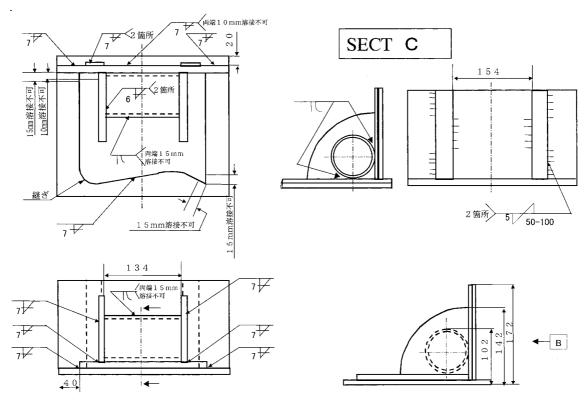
Shape and dimension of internal qualification test of specimen for welding.
